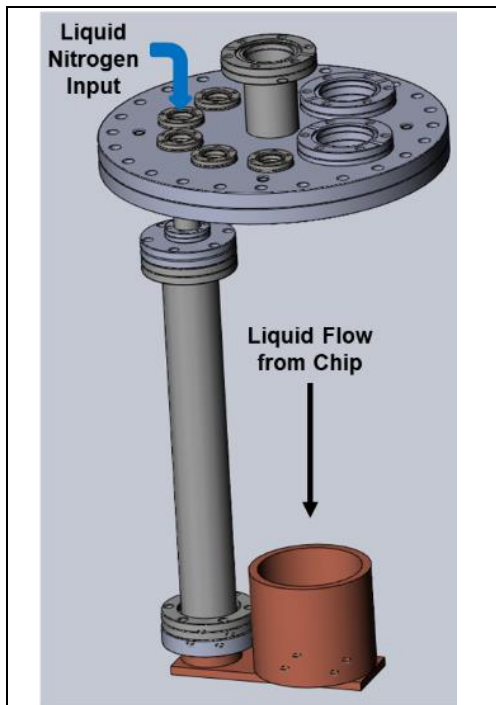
The stainless-steel flange designed with multiple ports. The CAD drawing of the custom 10 in stainless-steel (SS) conflat (CF) flange with cold trap assembly attached to a CF flange on the underside of the 10 in CF flange. The cold trap assembly consists of a SS nipple capped at the bottom with an Al flange. The copper rod attaches a copper catcher on a copper bar to the Al flange. The SS nipple insulates the liquid nitrogen (LN2) while the Al flange transfers the heat from the copper components and cools the copper pieces. The liquid flow into the microfluidic chip will be collected and cooled into the copper collector so that the liquid does not evaporate and increase the pressure of the vacuum chamber.
